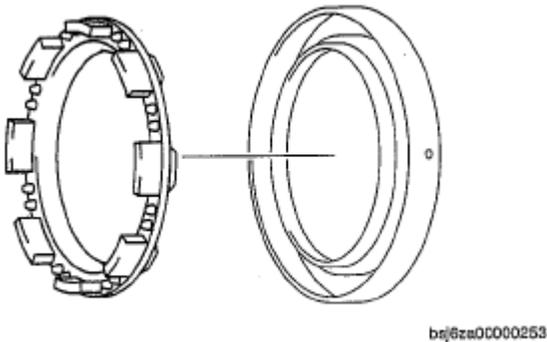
Identifying B1 Brake Piston On B1 Brake Cylinder
